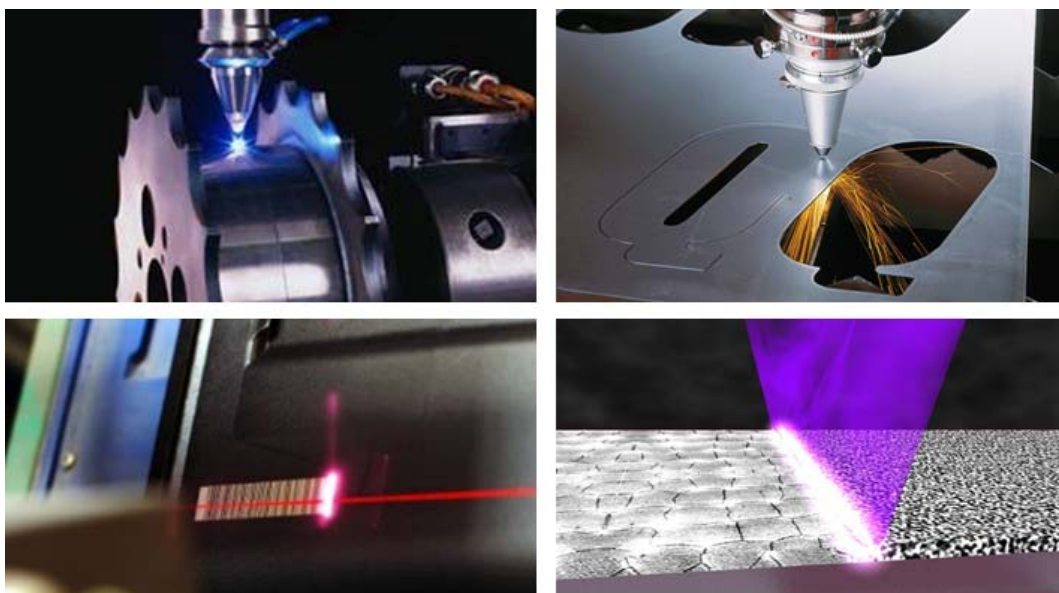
Application fields of laser processing such as welding, cutting, marking and surface annealing
